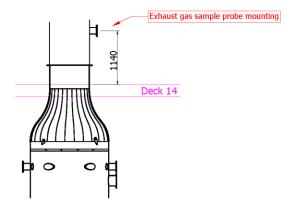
Position of sample probe, Scrubber Tower 1 & 2
